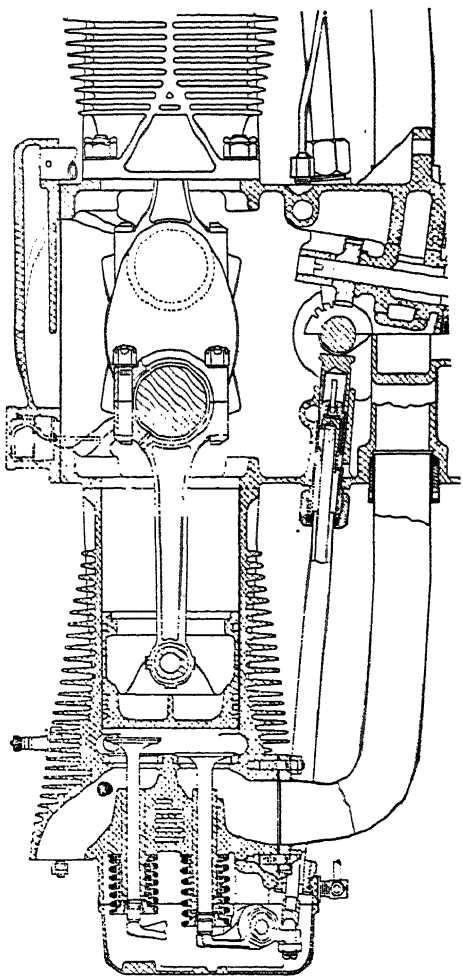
The valve mechanism of the Franklin four-cylinder opposed engine.
